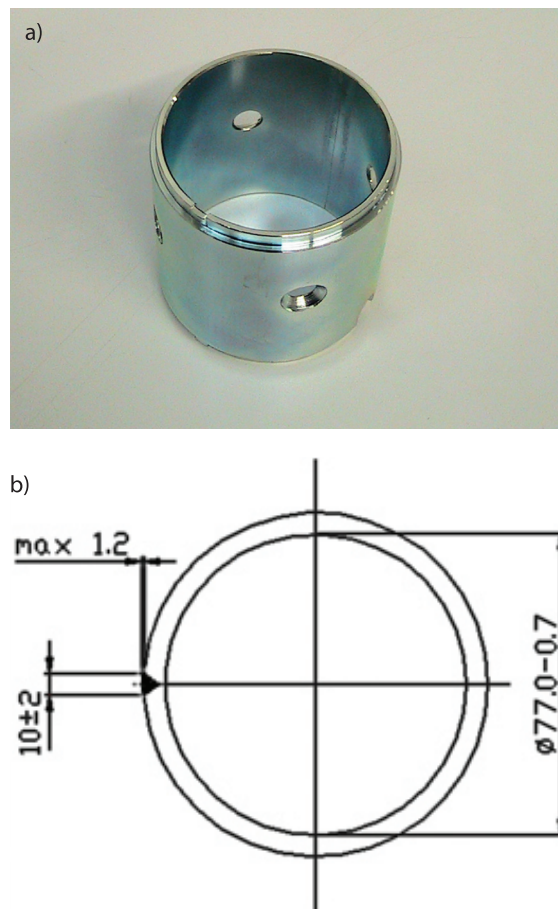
a) Finished yoke, b) drawing of the welding spot.
